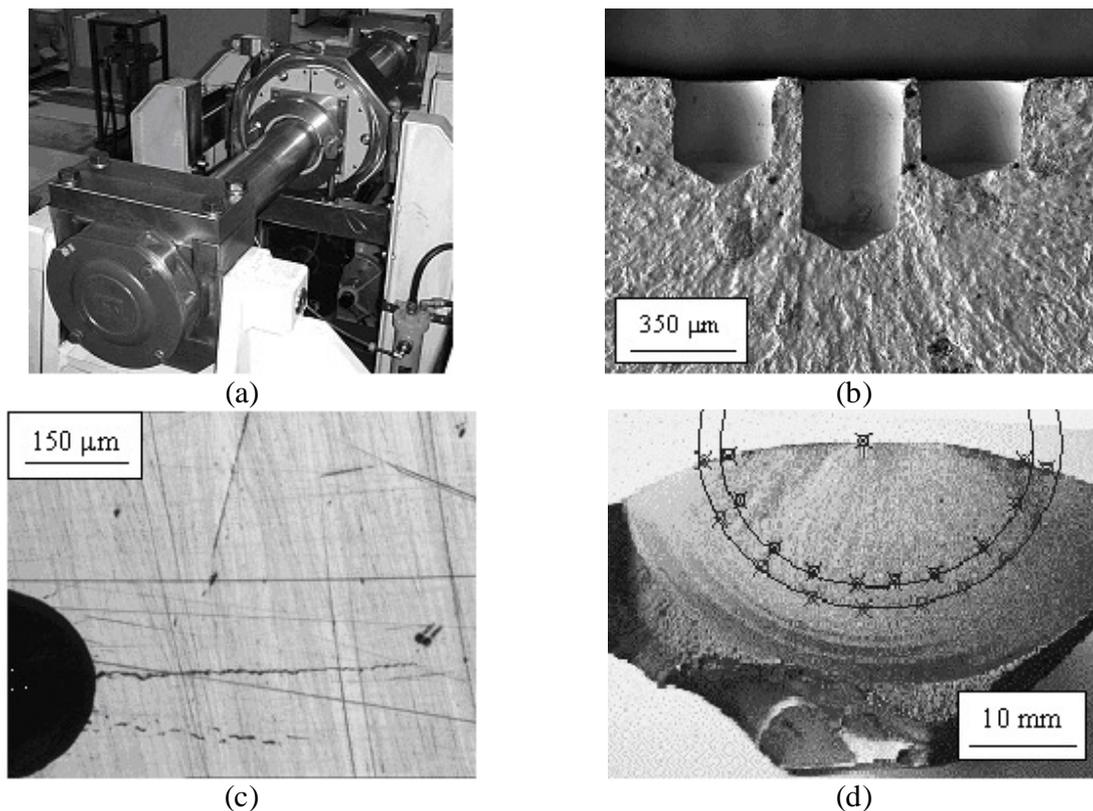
Details of full-scale experiments on railway axles: a) the test rig; b) micro-holes on a full-scale specimen; c) an example of the axle surface during a propagation test; d) analysis of the crack shape evolution.
